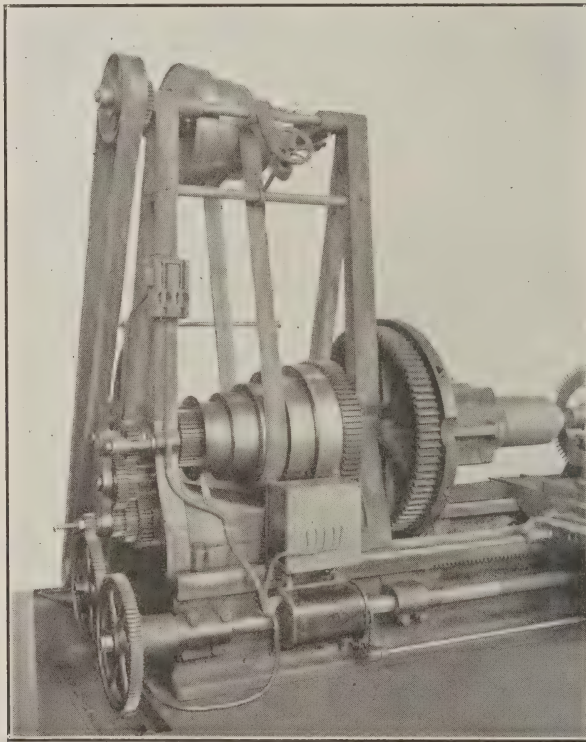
42-IN. MILES-BEMENT LATHE DRIVEN BY CONSTANT-SPEED MOTOR,
